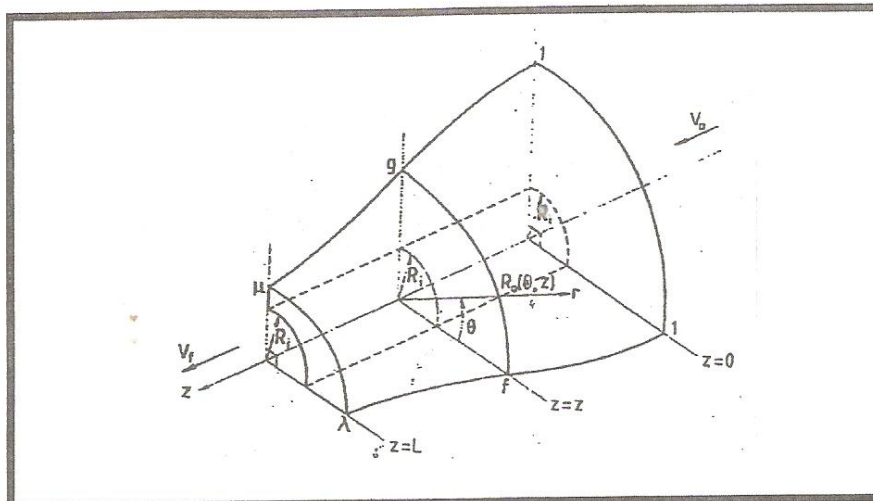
The schematic of three dimensional tube extrusion of an elliptic section from around tube
